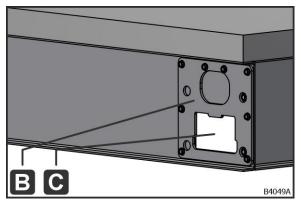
Reinforcing plate (B) on the transport frame opening (C)
